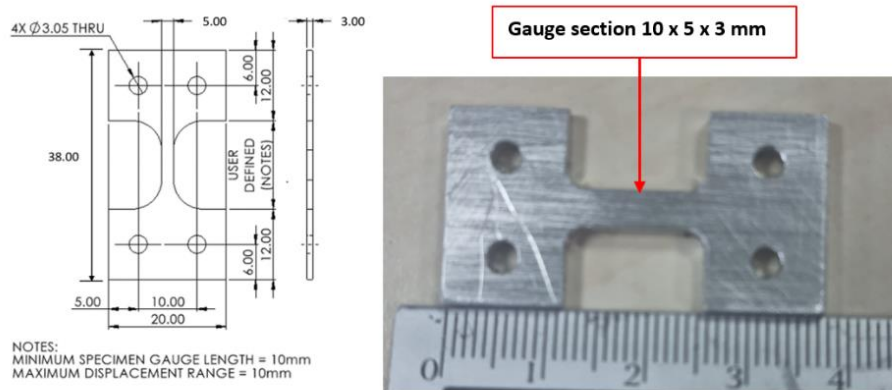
Specimen geometry, left (dimensions in mm) with tested specimen shown on the right
